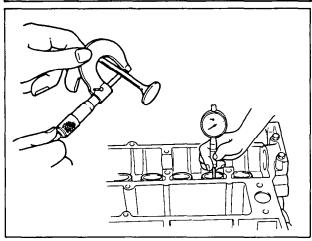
A-3 Measuring Valve Stem Dia. and Valve Guide I.D.
